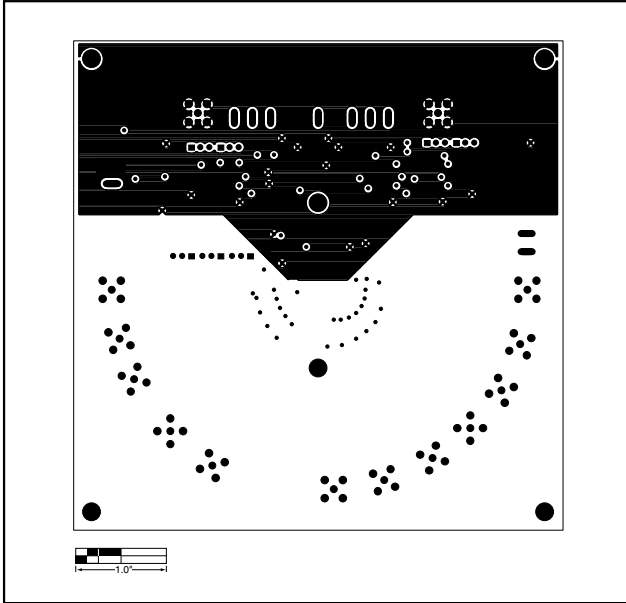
MAX5183 EV Kit PC Board Layout—AGND Plane (Layer III)
